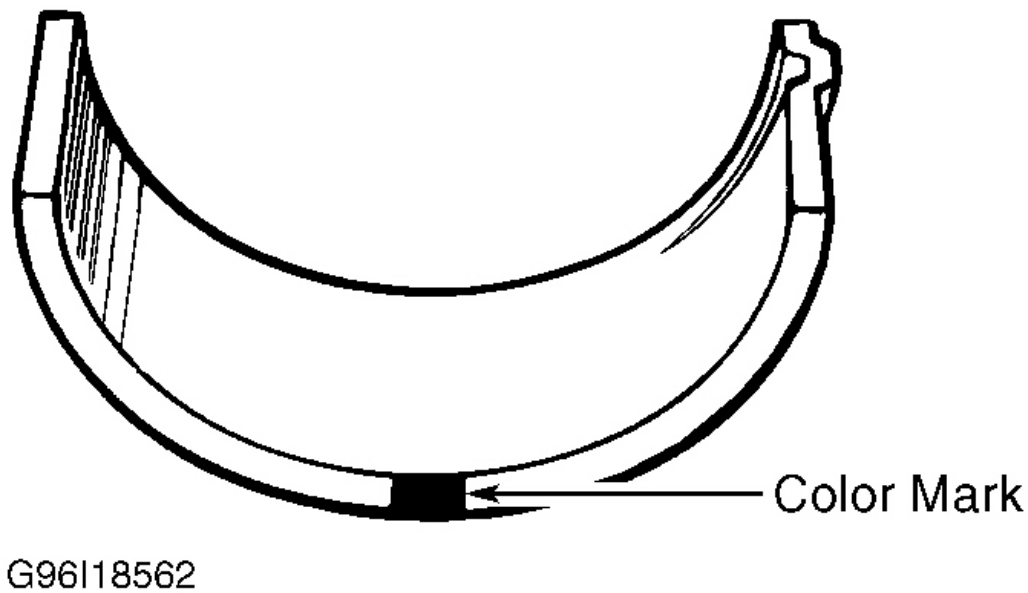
Identifying Standard & Undersize Bearing Color Marks
